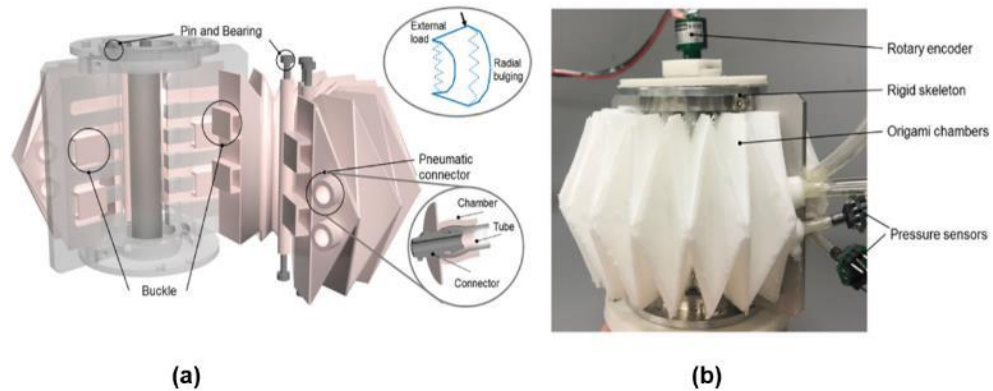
(a) Exploded view of the rotary OSPA design. (b) Prototype made from 3D printed TPU and other materials [15].
